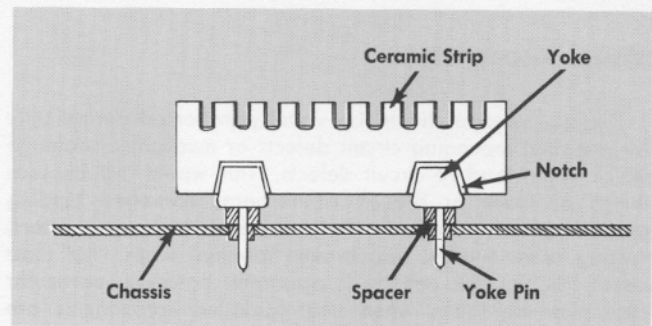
Ceramic terminal strip mounted in chassis.
